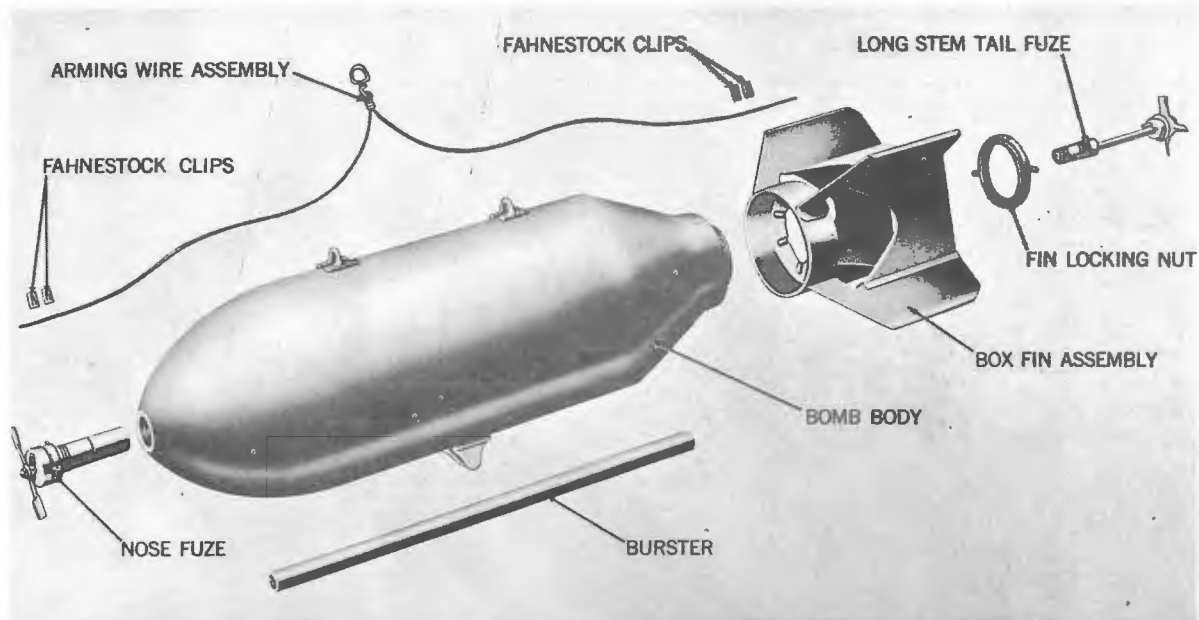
500-lb Incendiary Bomb AN-M76 with Fin Assembly AN-M109A1, Exploded View.
